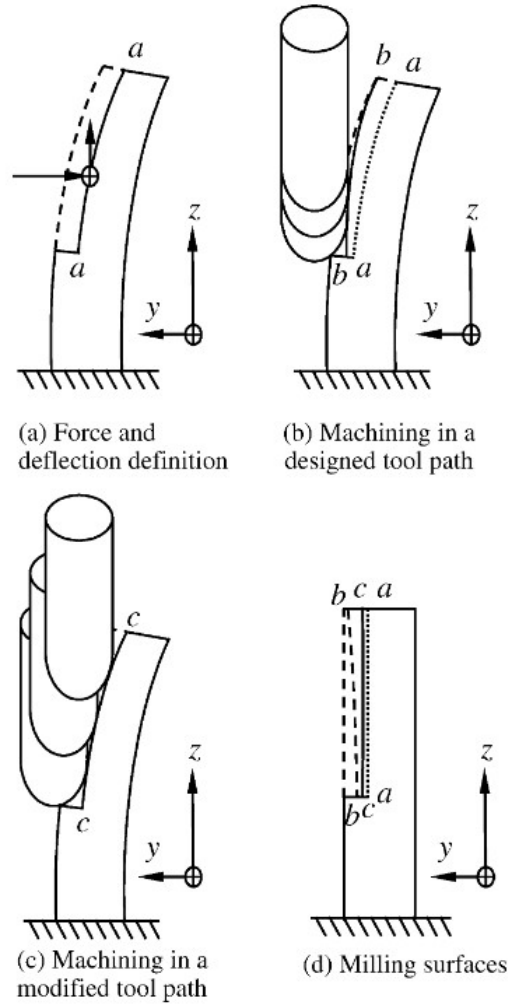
Optimization of end milling tool path (a) definition of deflection and force (b) cutting with normal tool path (c) cutting after modification of tool path (d) Surfaces of the machined part [24].
